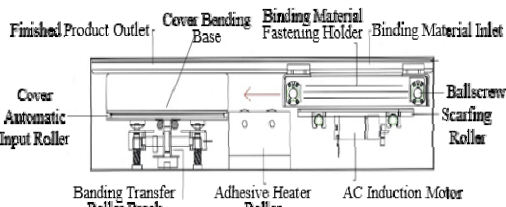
Outline diagram of adhesive wireless bookbinding machine with optimal motor control and automatic cover insertion
